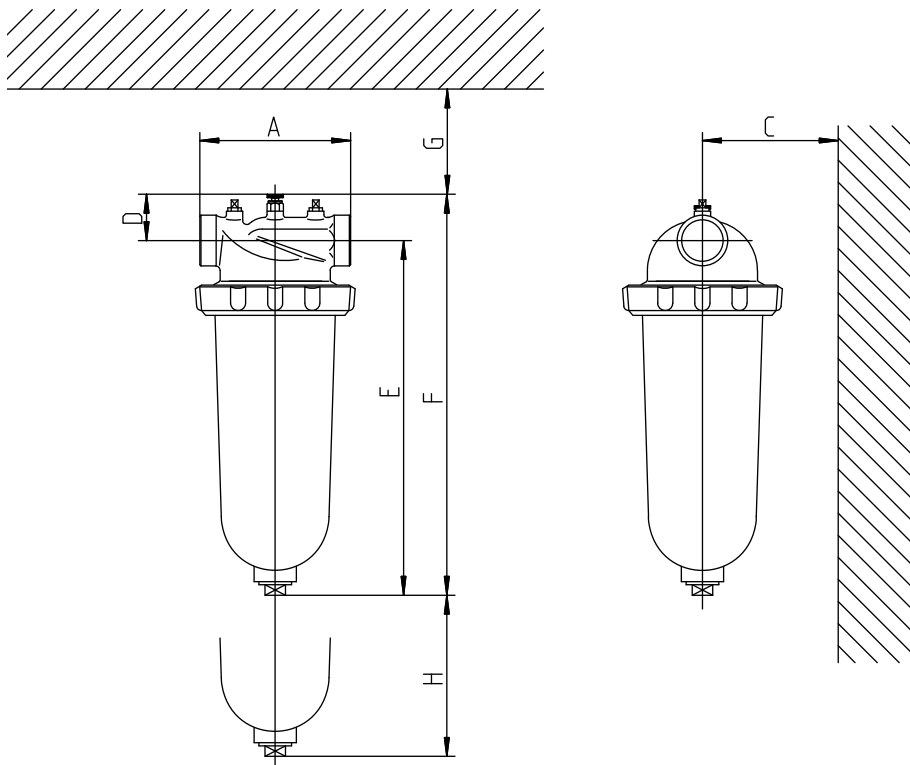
Dimensional drawing of GENO®-hot water filter S-WW 1" and S-WW 1½"
